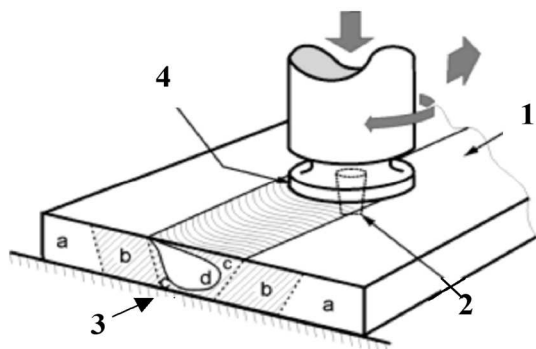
Friction Stir Welding and representation of individual microstructural zones in a welded joint [13]; 1 - workpiece, 2 - welding mandrel, 3 - fixed pad, 4 - tool arm
